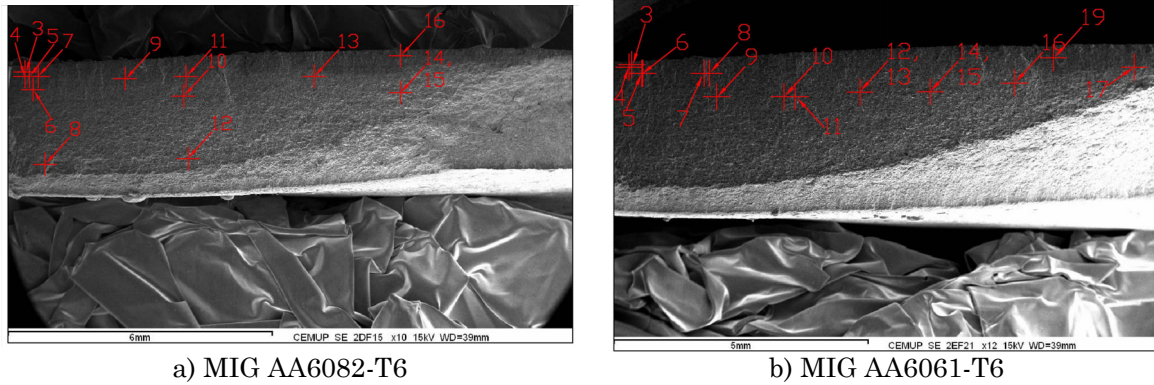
Fatigue crack of MIG welded specimens, striation measurements sites.
